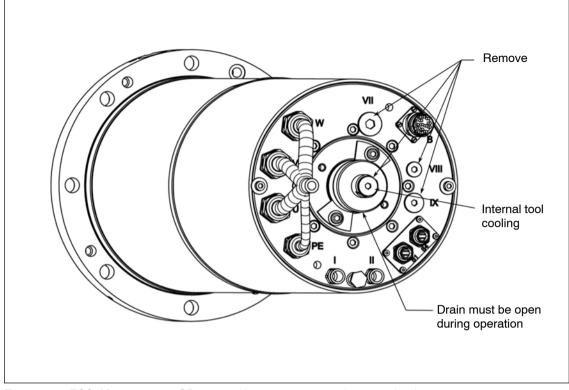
ECS–M pneumatic 2SP120 -1H 2–-
